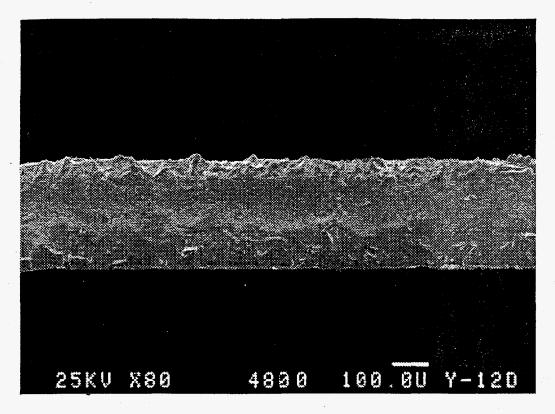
View of one face of the cut resulting from Test 2-12. (Twelve passes, ~17.6W @ 2.4 ipm)
